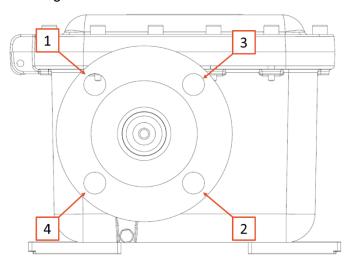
Front view of lap-joint flange, hub and bolt holes. Tighten bolts in steps in order 1-2-3-4 to ensure even compression of the gasket
